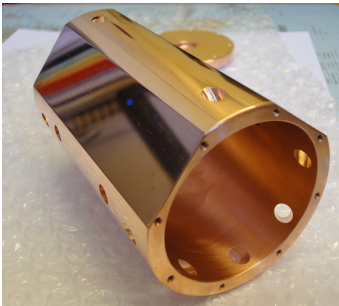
Gold coated cylindrical radiation shield with two cutting edges and two lids.
